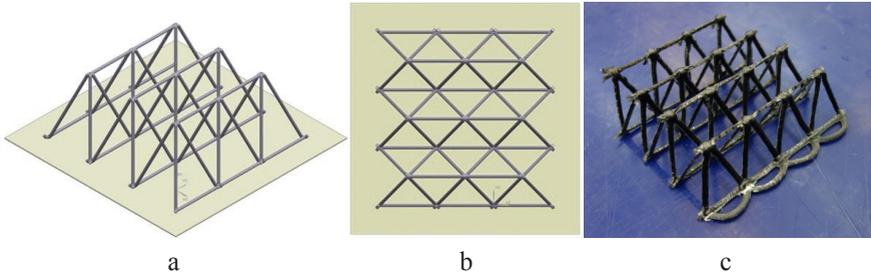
Truss structure with longitudinal reinforcement along the vertices of the pyramidal elements: a – truss linear corrugation structure, b– net, c – truss structure sample
